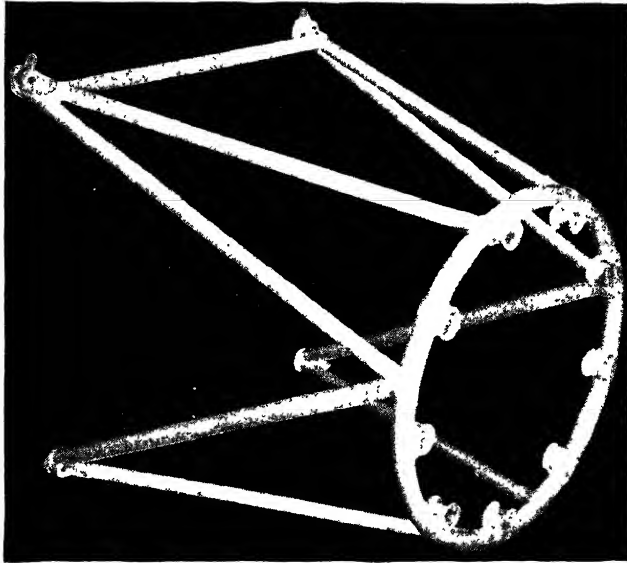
Welded-steel-tubing mount for a radial engine. (*Aero Digest.*)
